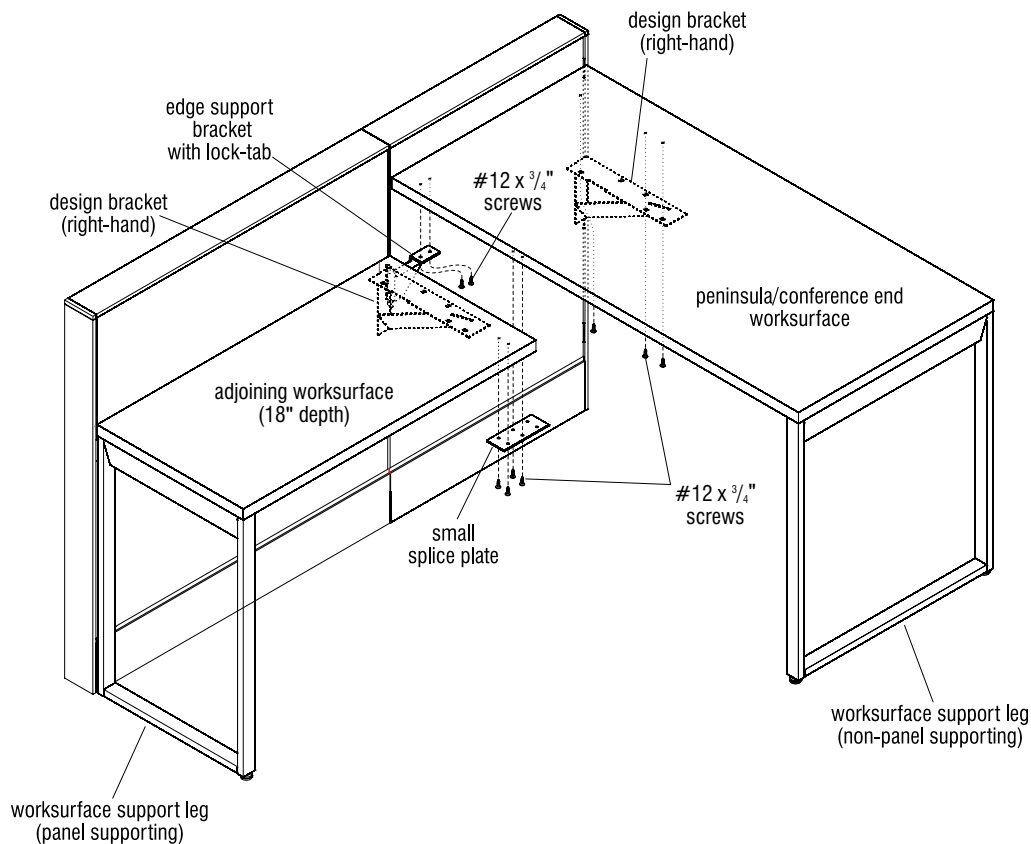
Worksurface Support Leg to Peninsula/Conference End Worksurfaces
